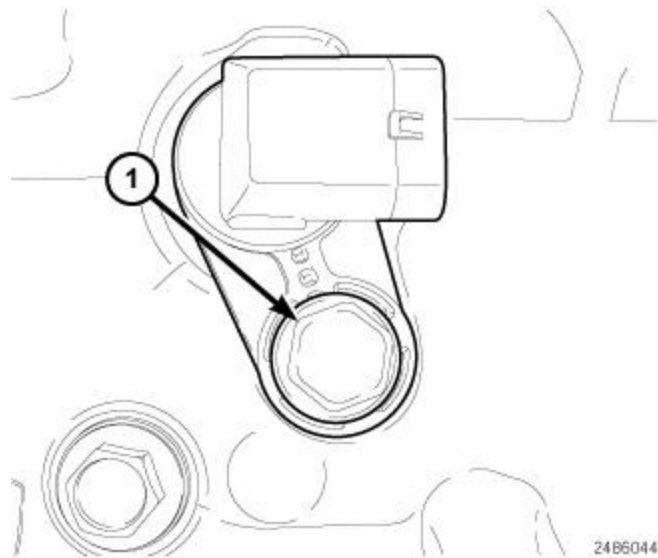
Crankshaft Position Sensor Mounting Bolt
